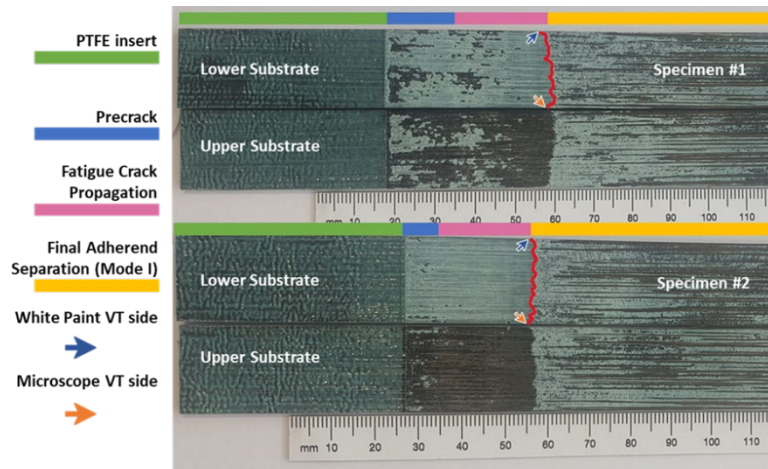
Fracture surfaces. The final crack front is highlighted in red.
